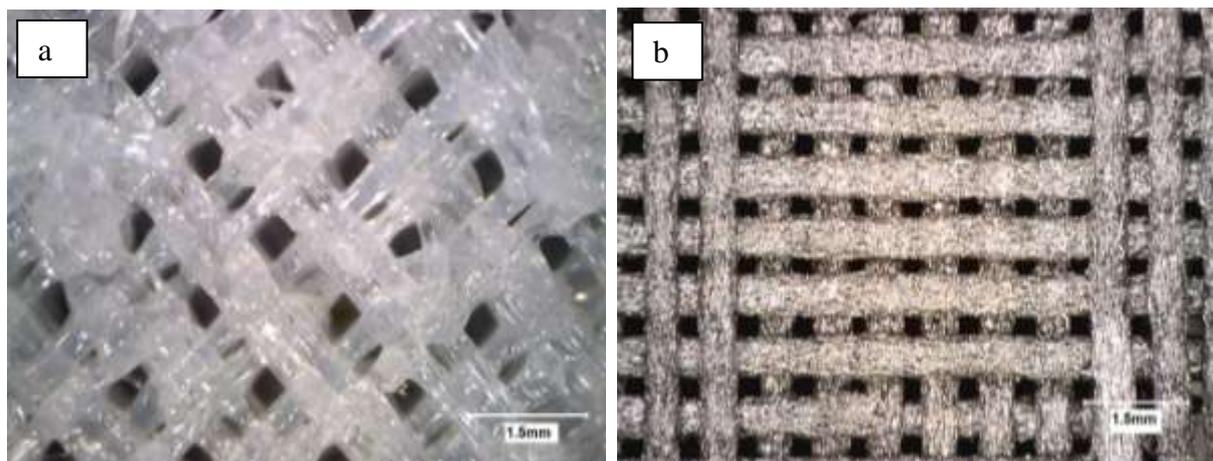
Morphology for PETG and Carbon/PETG 3D printed specimens.
